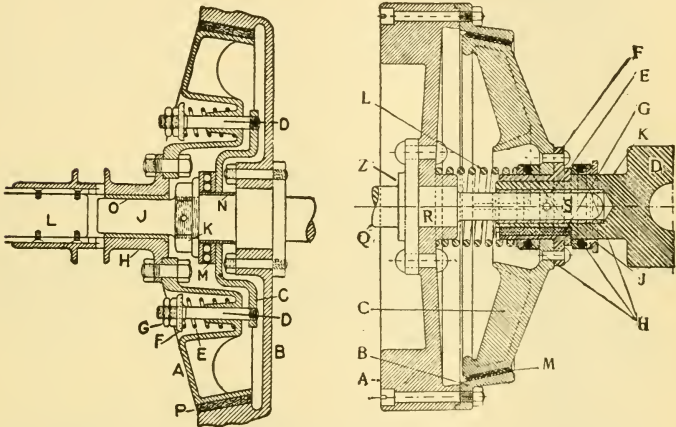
External cone clutch. A, fly wheel clutch cone; B, fly wheel; C, fly wheel clutch stud plate; D, D, clutch spring studs; E, clutch spring; F, spring retainer; G, retainer lock nut; H, sliding sleeve for setting clutch; J, crank shaft end; K, crank shaft nut; L, tail shaft; M, ball thrust collar; N, ball thrust bush; O, sliding sleeve bush; P, clutch cone leather.
